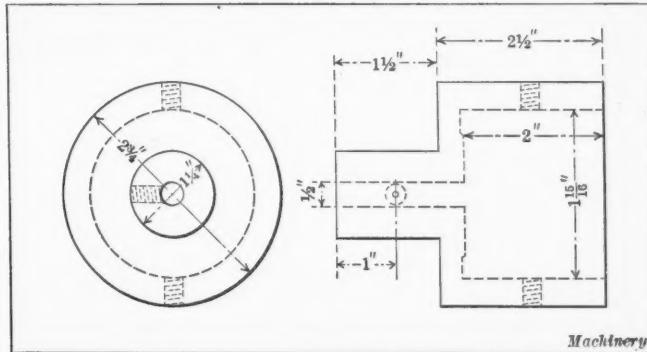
Drilling Attachment for Use on Boring-bar shown in Fig. 1
